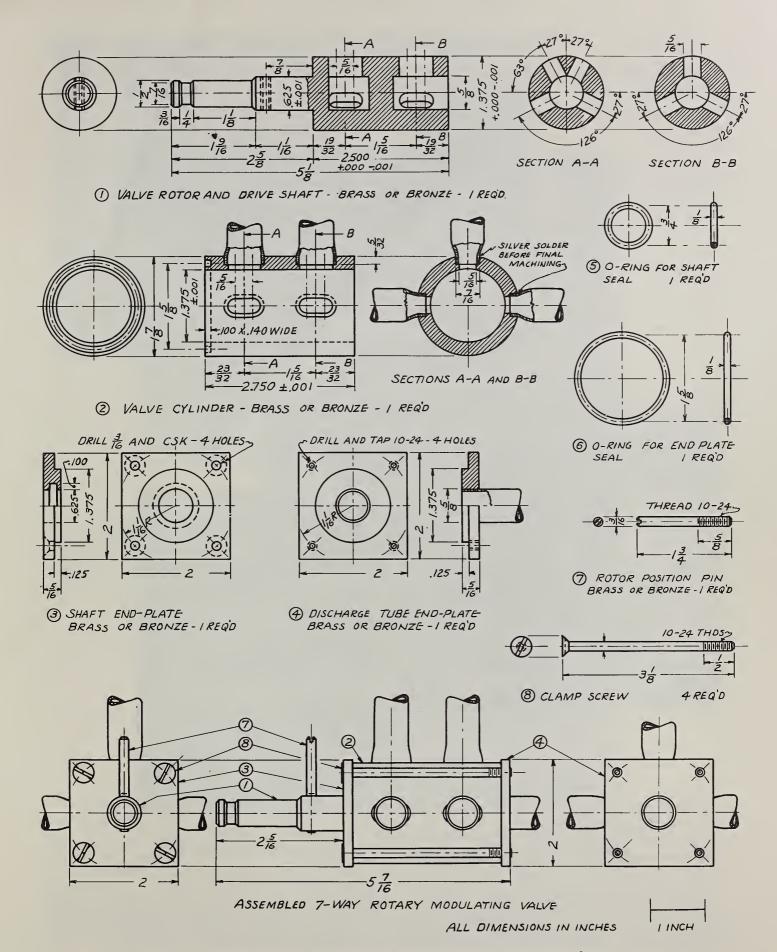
Installation drawing of 7-way rotary modulating valve.
